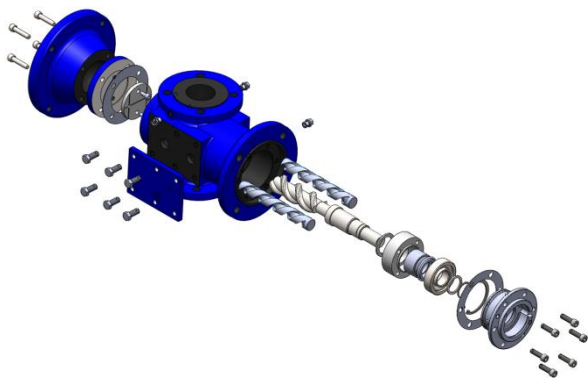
Exploded View of the 3D model of the assembly of the three-spindle screw pump
